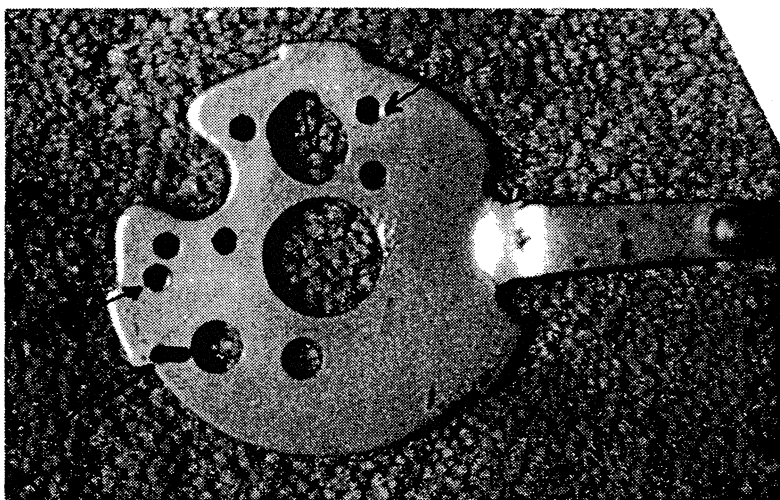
This is a cleaned upper plate, modified & ready for assembly.
